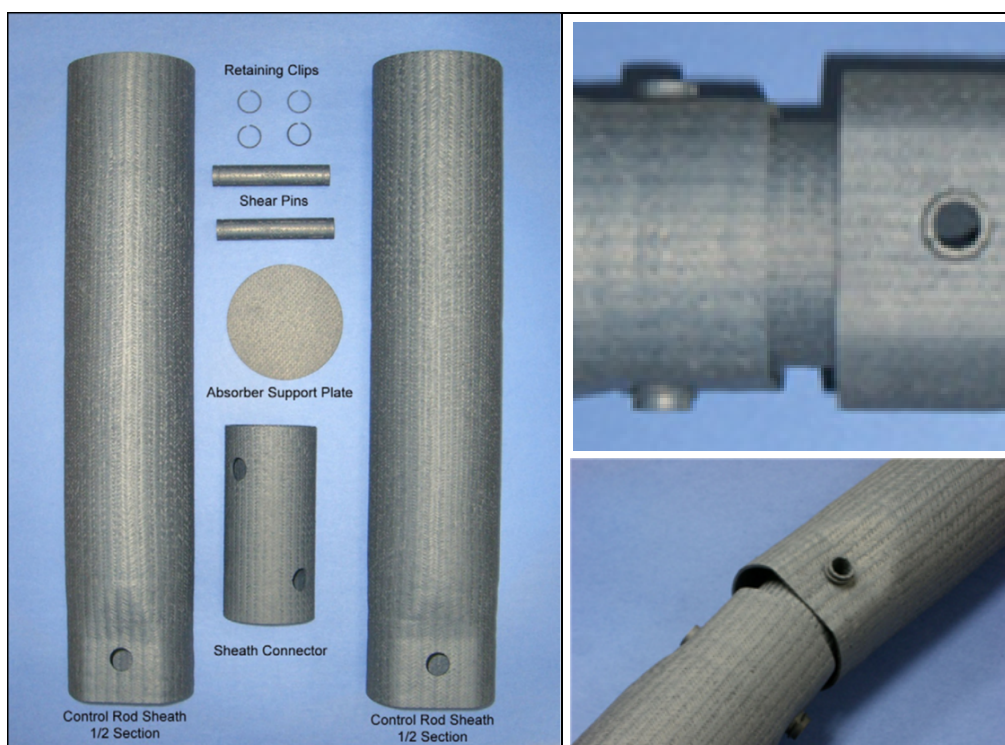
Nuclear Grade SiC/SiC control rod sheath components prior(left) and after (right top and bottom) assembly. [15][16]
